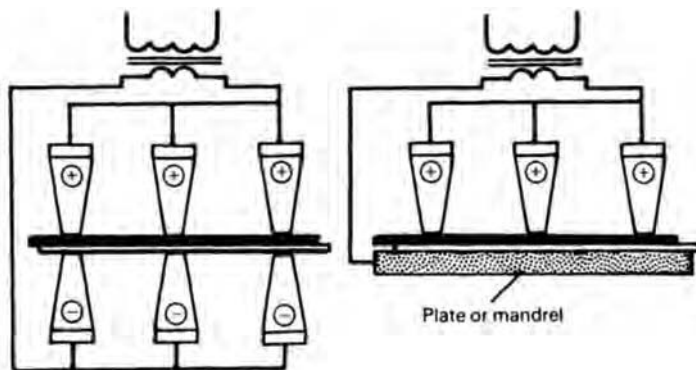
Parallel welding for multiple spot welds with one transformer connected to multiple electrodes
